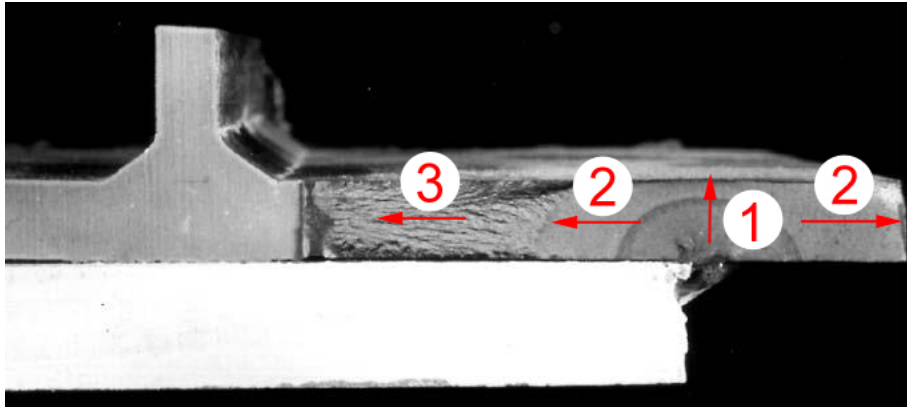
Crack surface showing fatigue crack growth (with stages of crack propagation identified).
